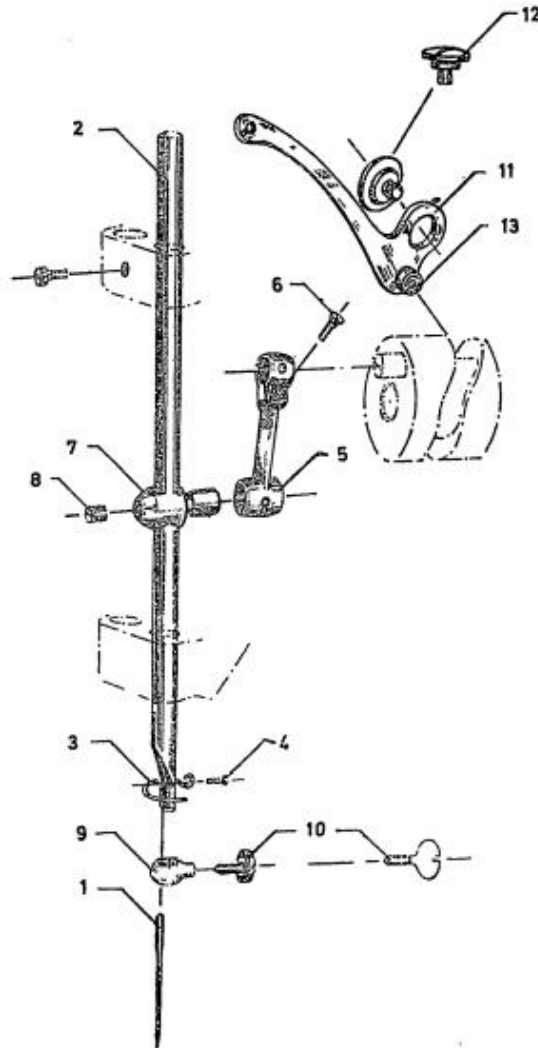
NEEDLE AND THREAD TAKE-UP LEVER ASSEMBLY
